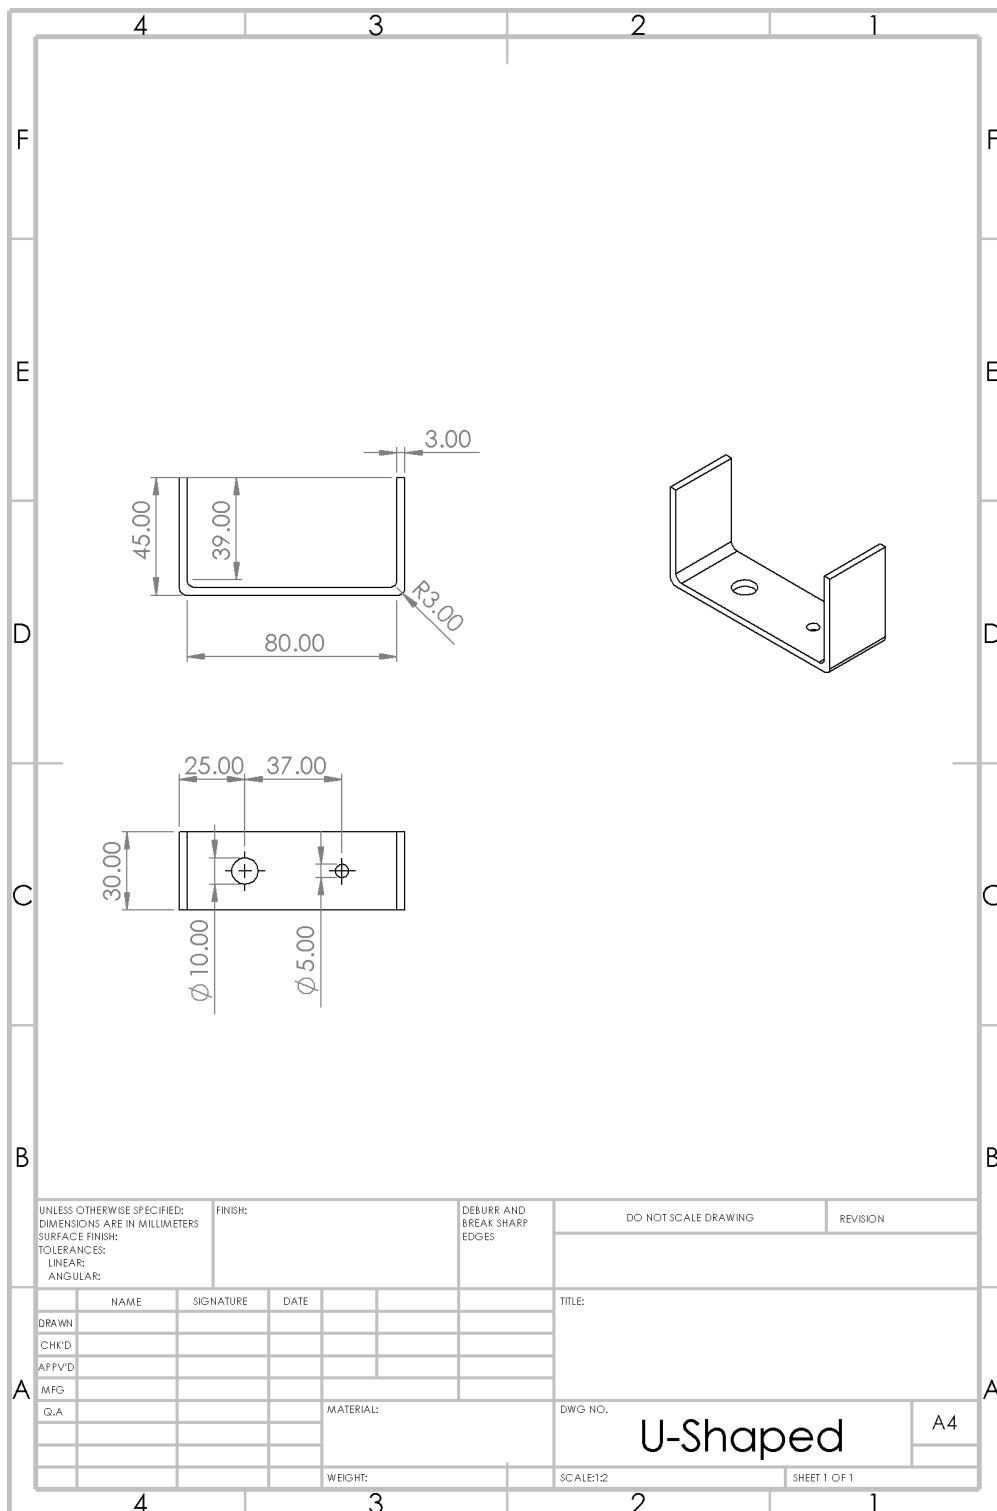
Technical drawing of the U-shaped plate used in the experimental setup with the support platform.
